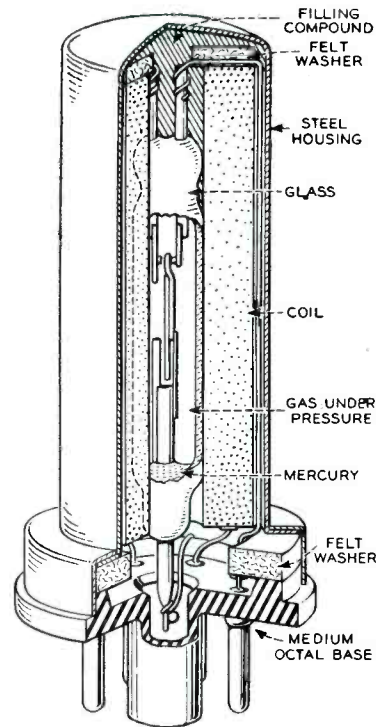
Cross-section of one type of mercury relay in which both a front and back contact is provided.
